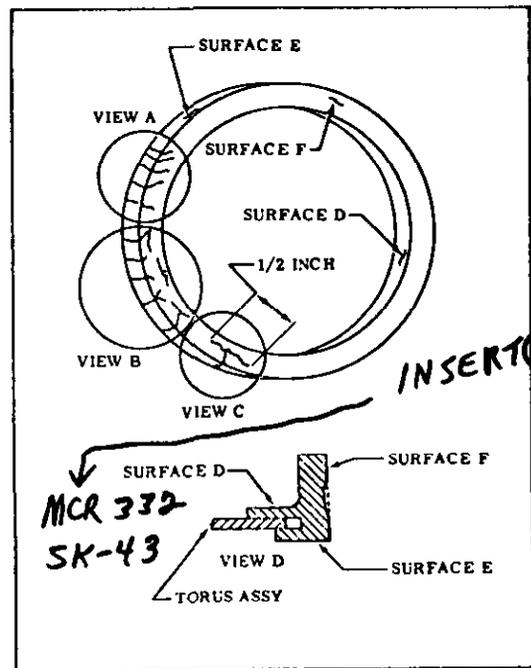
Inspection of Torus Assembly Inner Flange
